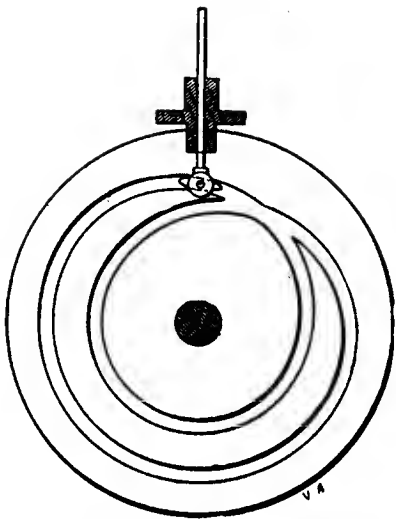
The predecessor of the exhaust valve cam and customary turning gears.
